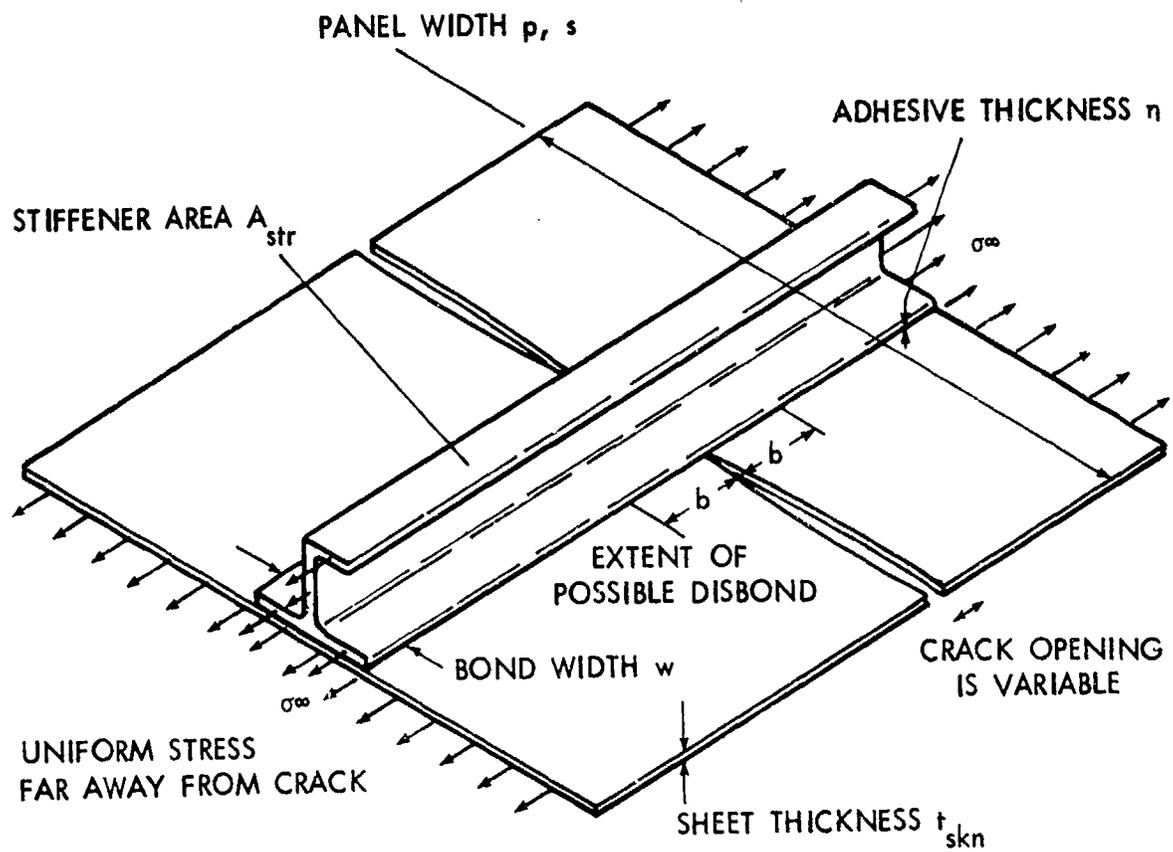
STIFFENER BONDED TO FULLY CRACKED SHEET
